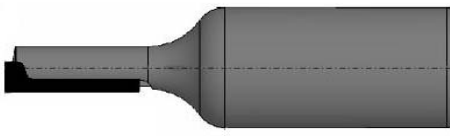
Shank cutter with non-continuous spaces between cutters (milling tool 2)
